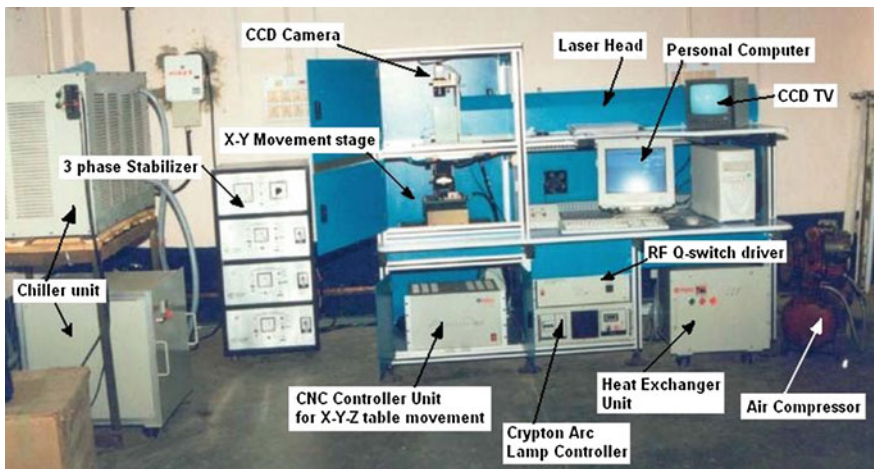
Photographic view of the pulsed Nd:YAG laser machining system (Kibria et al. 2012)
